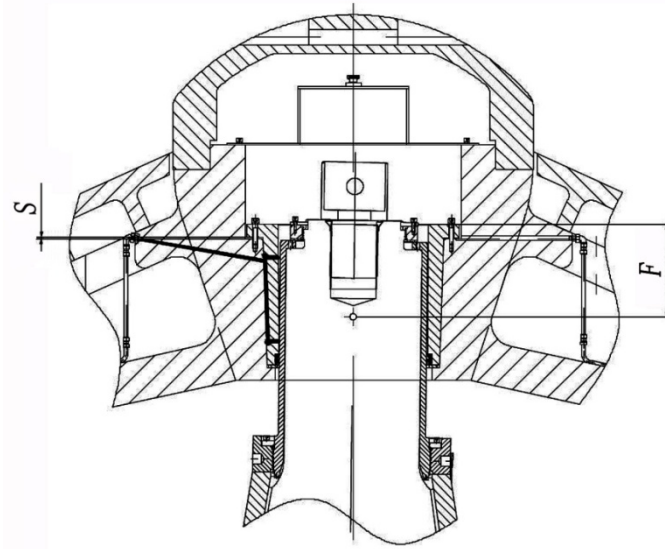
Height value F from flange upper face of spider bushing to the hang point of main shaft, and mounting clearance S of spider bushing flange
